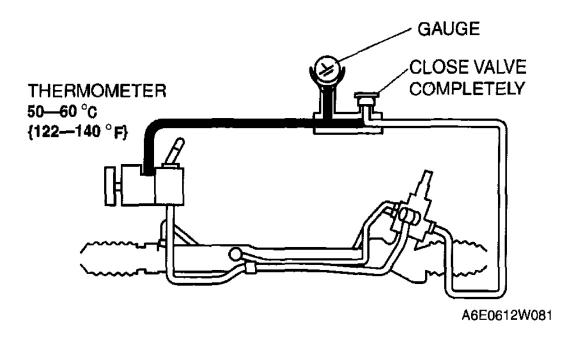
Inspecting Fluid Pressure (Valve Closed) Courtesy of MAZDA MOTORS CORP.
